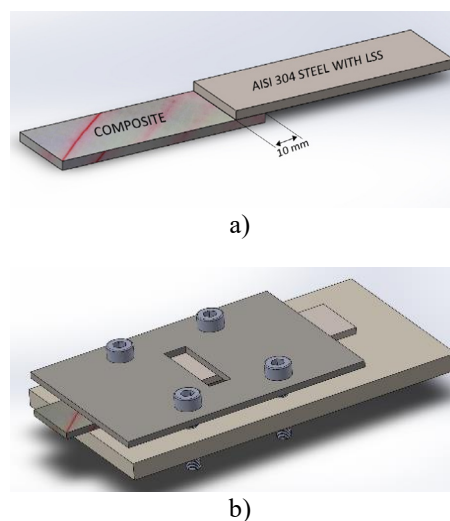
Laser joining configuration of samples. a) Specimens position and overlap. b) Clamping system.
